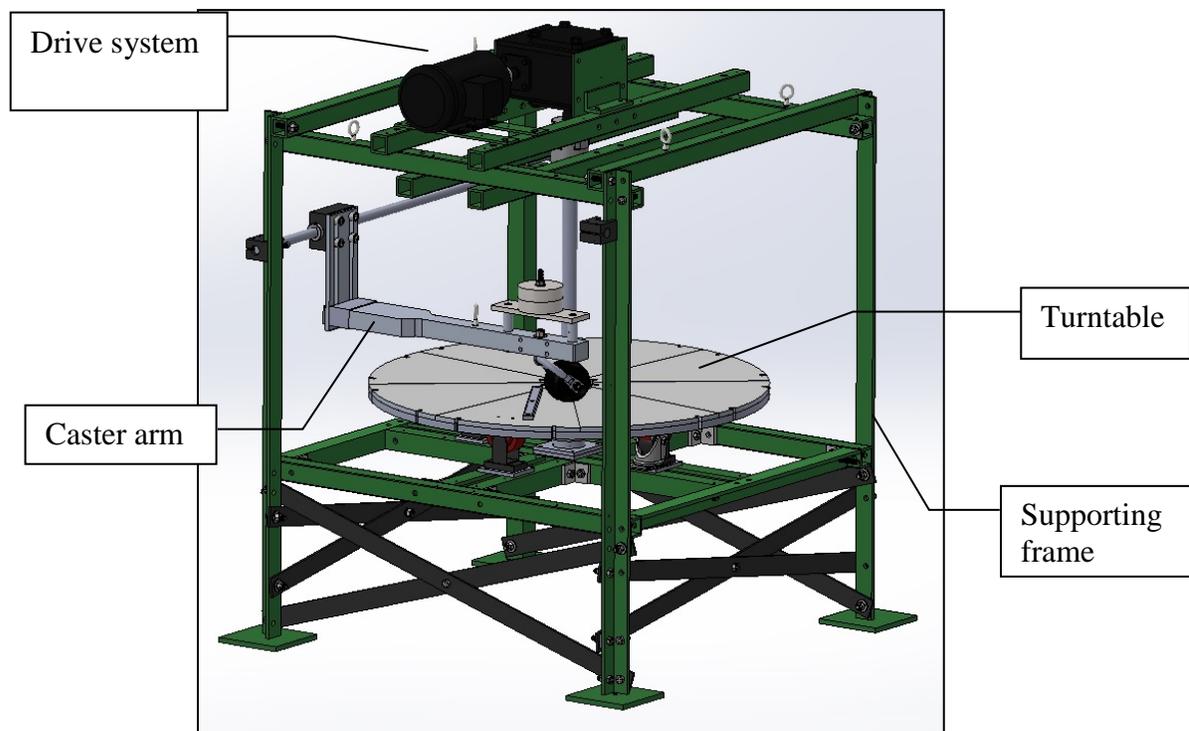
Final caster test equipment drawing for fabrication (includes only one caster support arm)
